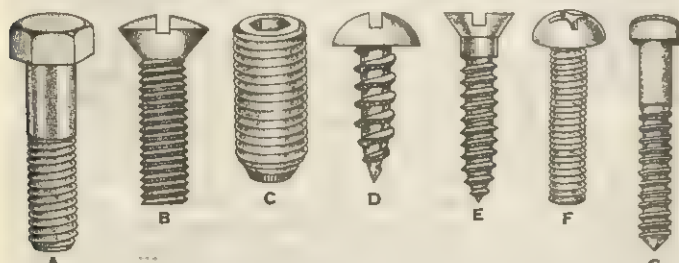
SCREWS AND SCREW HEADS: (A) CAP SCREW, (B) MACHINE SCREW WITH OVAL HEAD, (C) SET SCREW WITH HOLLOW HEAD, (D) SELF-TAPPING SCREW, (E) FLAT-HEAD WOOD SCREW, (F) PHILLIPS HEAD SCREW, (G) LAG SCREW
